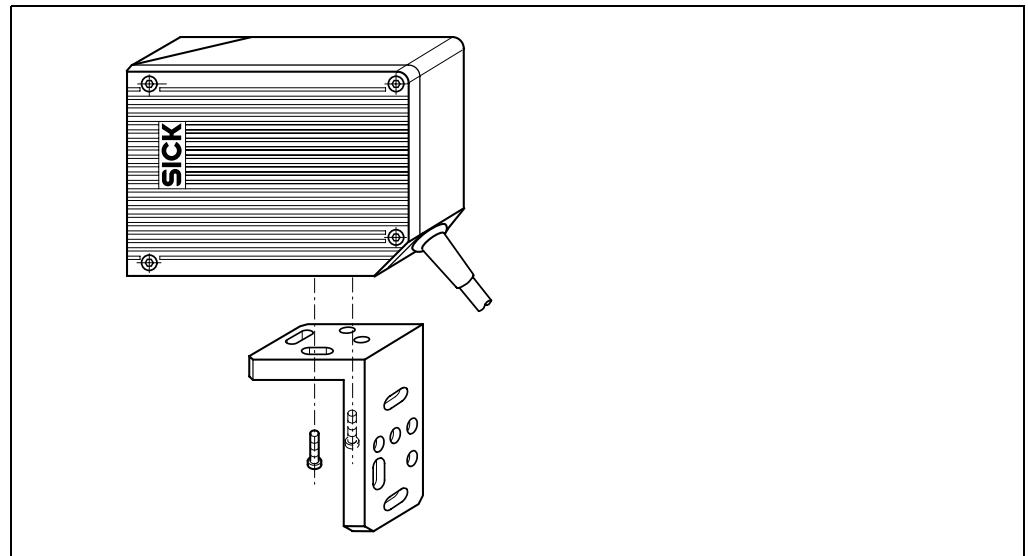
Example: Fixing the ICR845-2 with the mounting bracket no. 2025491
